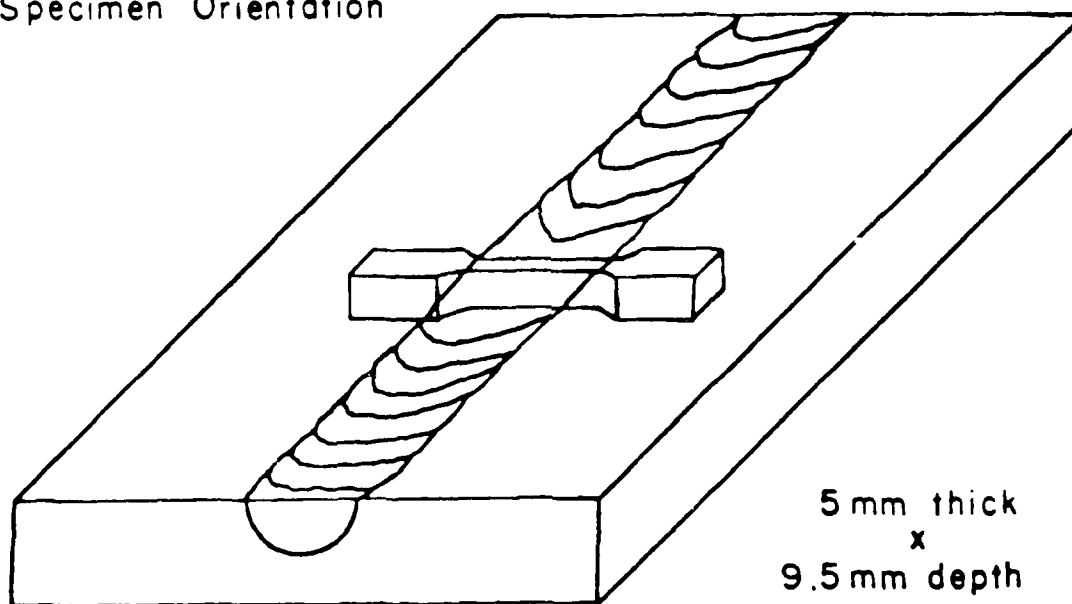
Schematic of a submerged arc weld showing the dimensions and orientation of tensile bar specimens.
